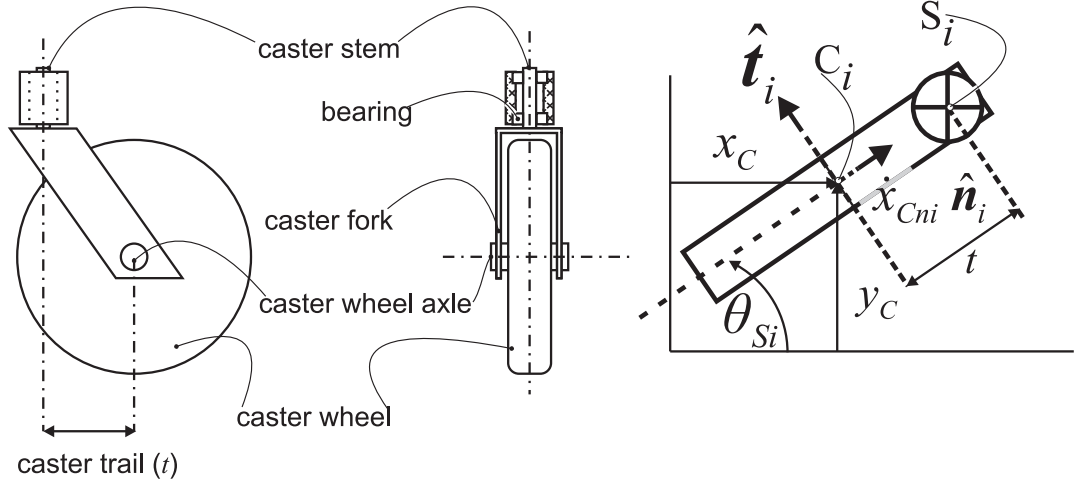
Shows (left) the labelling for the caster assembly and (right) a top view with the kinematics.
